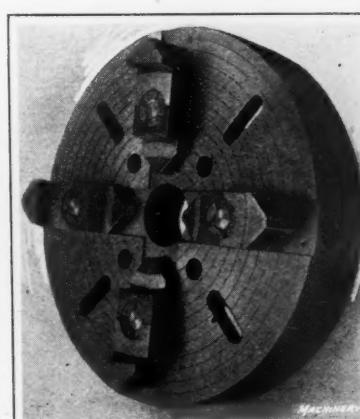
Four-jaw Chuck made by Simplex Tool Co.
